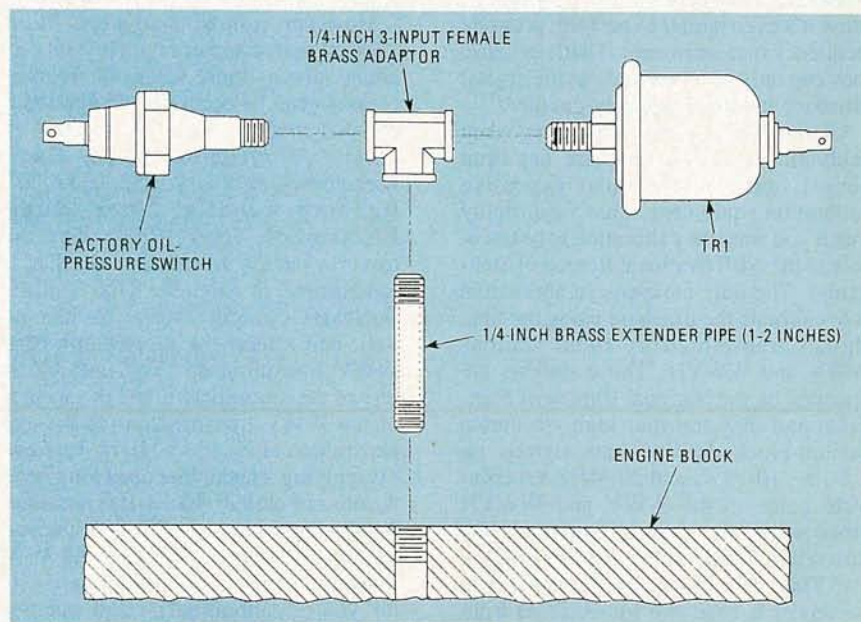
THIS ARRANGEMENT will let you use both your new gauge and the old "idiot light."
